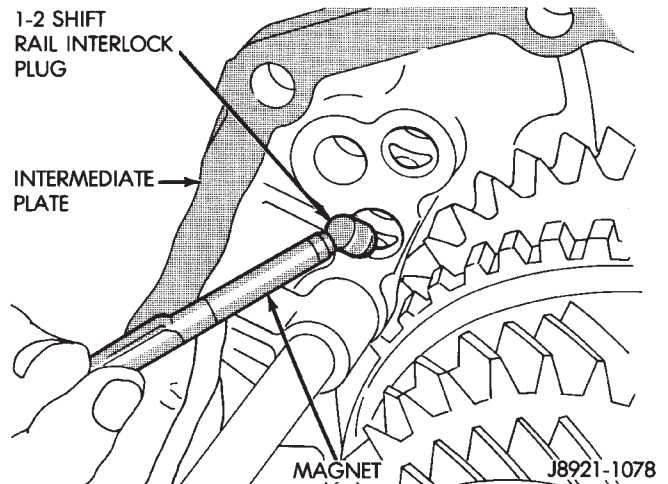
Removing 1-2 Shift Rail Interlock Plug
